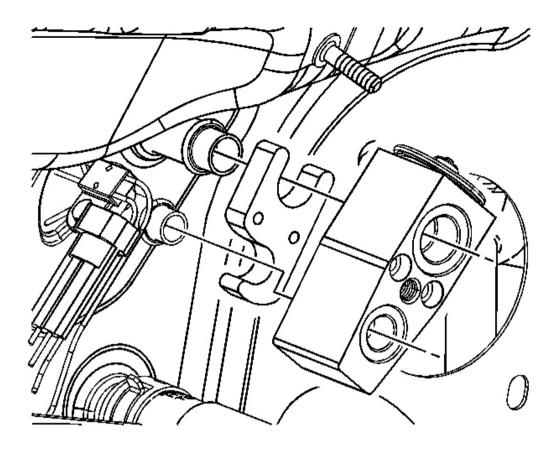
Sealing Washers, Evaporator Outlet Hose, Liquid Line & Protective Caps Courtesy of GENERAL MOTORS CORP.
